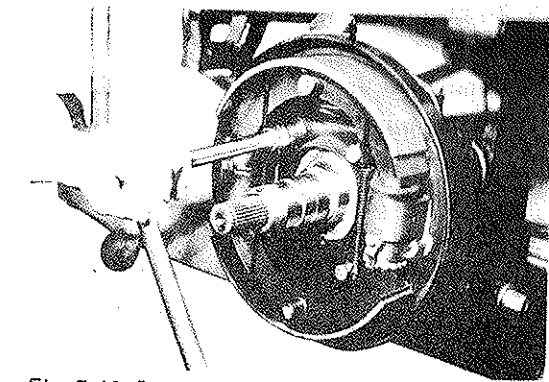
Installing Knuckle Spindle and Backing Plate
